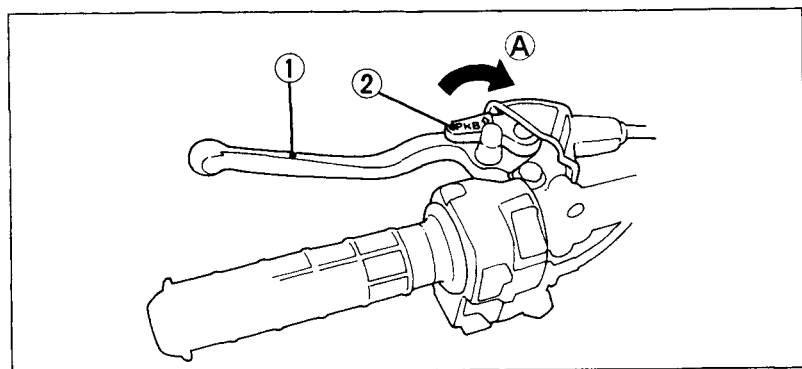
(1) Rear brake lever/Parking brake (2) Lock lever (A) To lock
